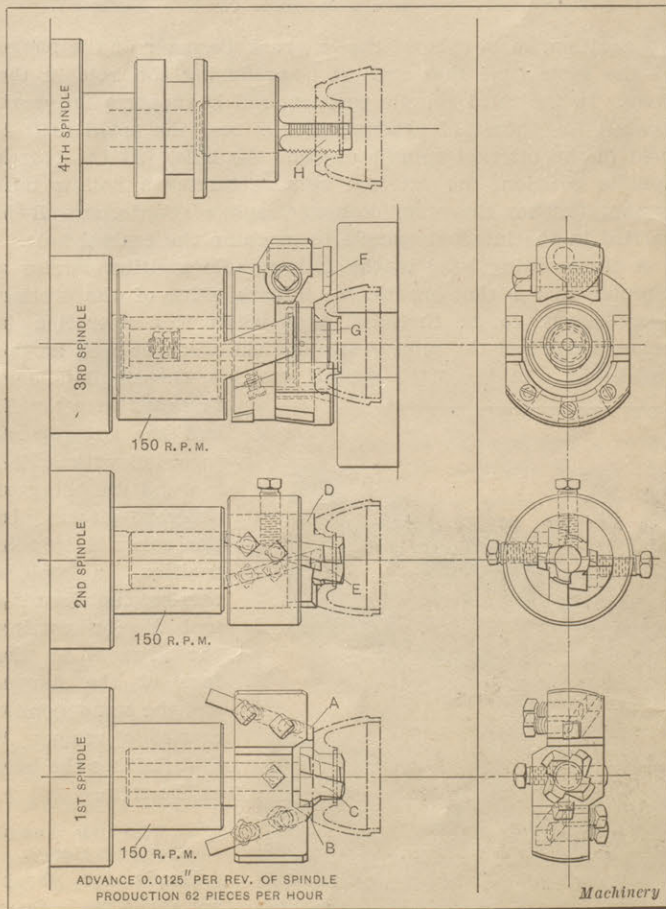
First Series of Operations on Shrapnel Head on the New Britain Automatic Chucking Machine
